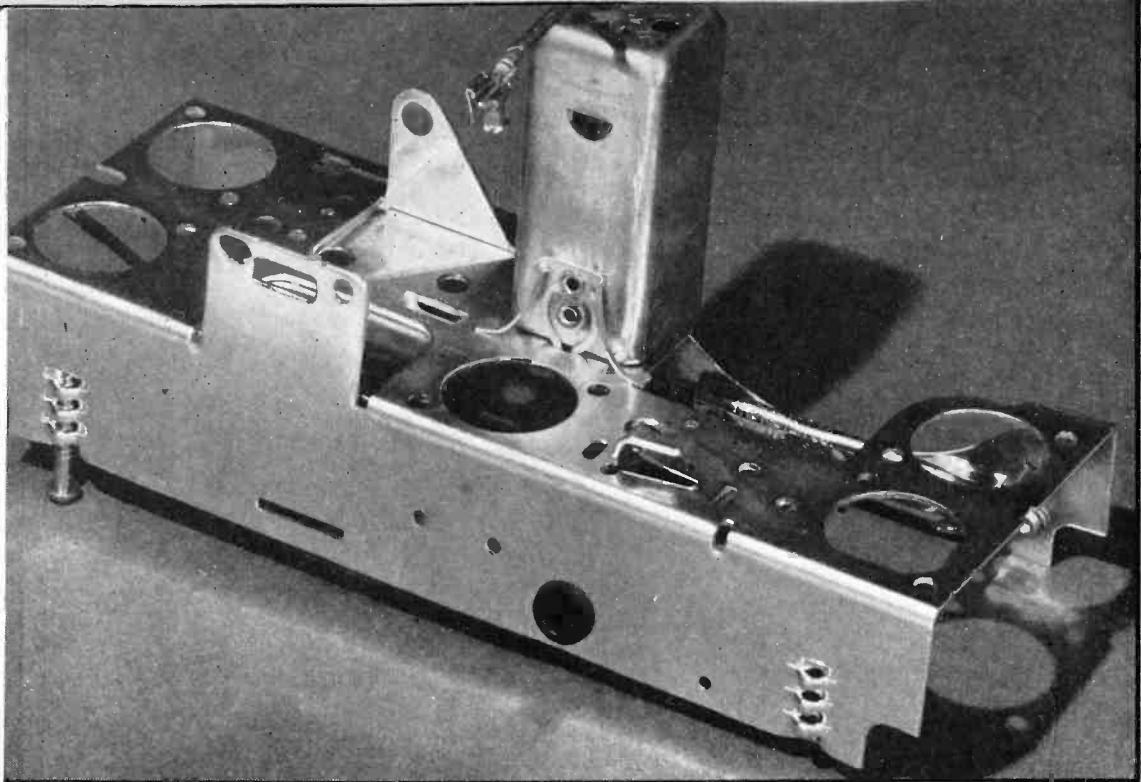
The coil can is held tightly to the chassis by the side springs. The chassis sides are punched to provide screw holes in an edge-wise direction. Note the several brackets for fastening which were formed during the punching operation
